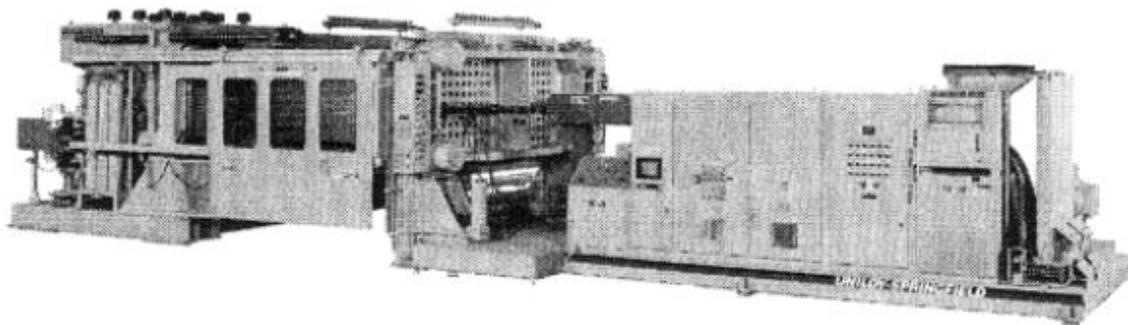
Multi-nozzle Uniloy machine. (Courtesy of Uniloy/Milicron.)
